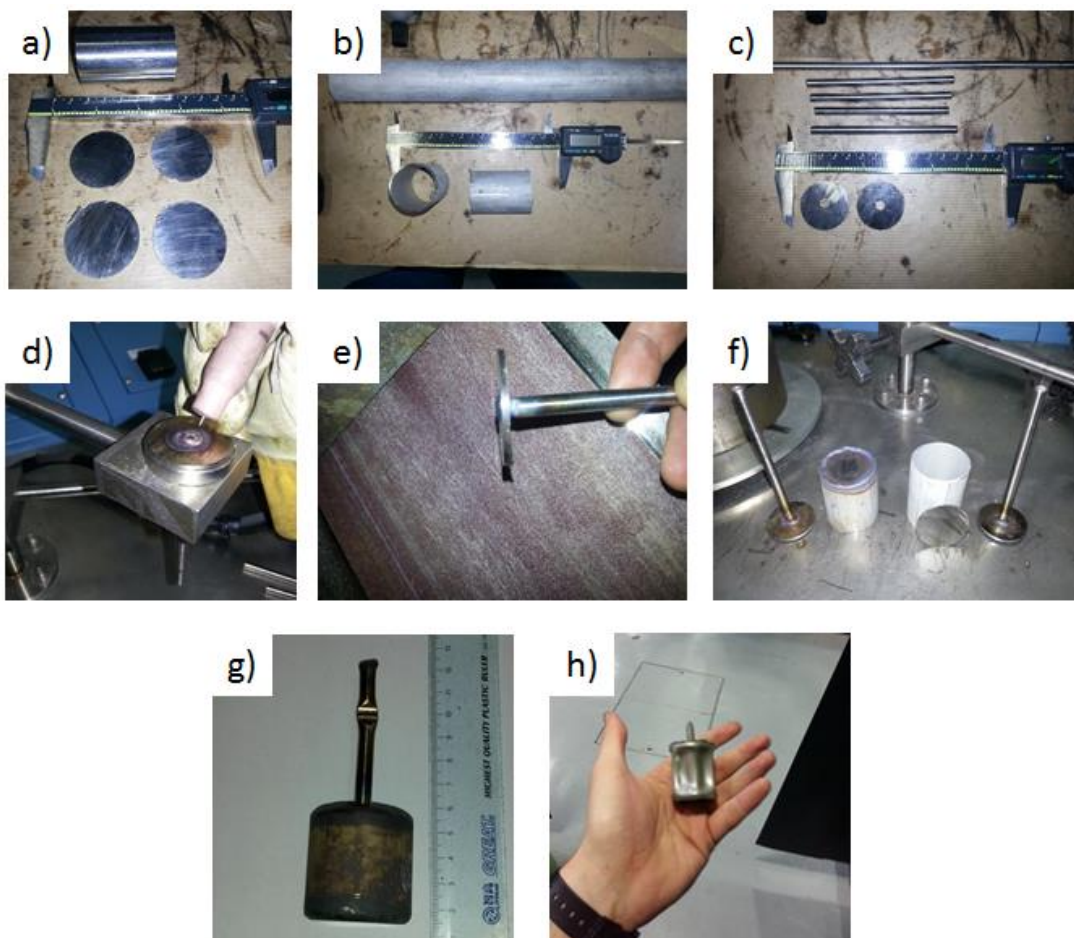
Images of HIP canister manufacture a) solid steel rod cut into coins to provide end caps b) tubing cut to sample size c) end caps drilled with hole for evacuation tubing d) welding of evacuation tubing to end cap e) finishing of end caps f) canister components before filling g) a sealed canister pre-processing h) a processed HIP canister.
